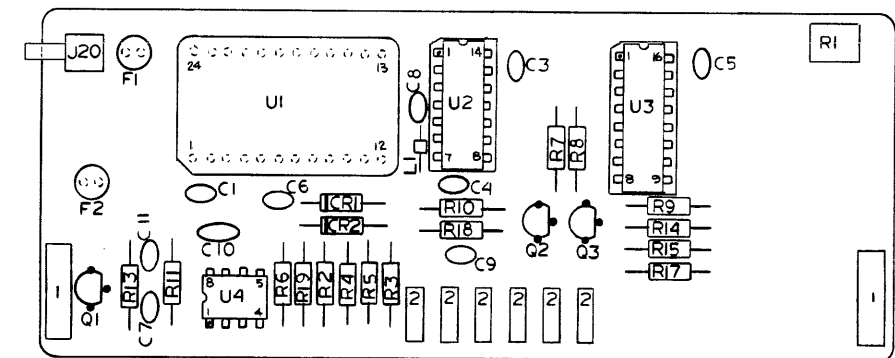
A9 520 MHz Prescaler PCB Assembly , -07 Option
